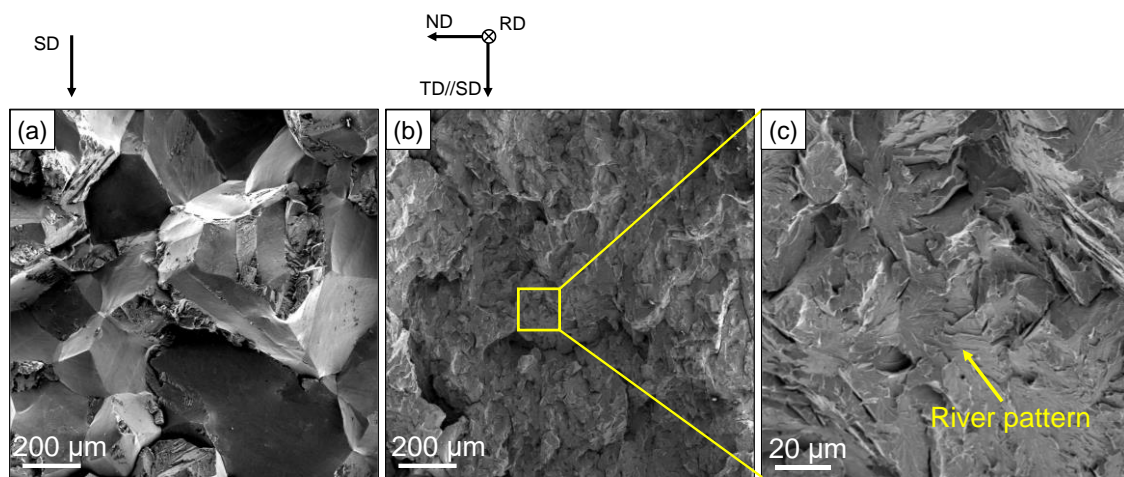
Fracture surfaces of (a) as quenched and (b)(c) hot rolled 10Mn-0C tested at 77 K ((c) is enlarged view of (b)).
